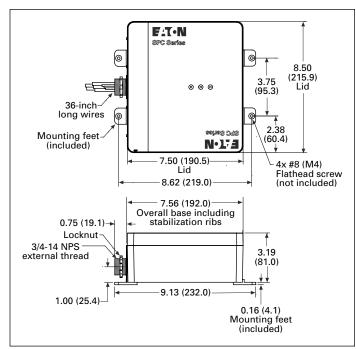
P1 Enclosure, NEMA 4X with Mounting Feet Dimensions, Weight = 2.5 lb
